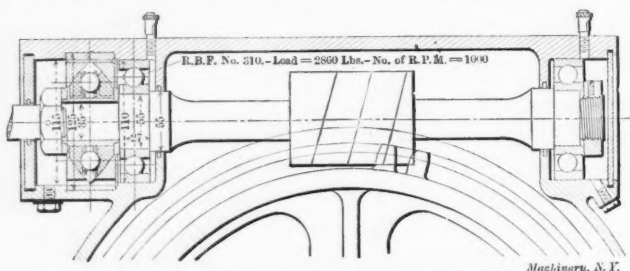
Double Thrust Bearing applied to a Worm Shaft
